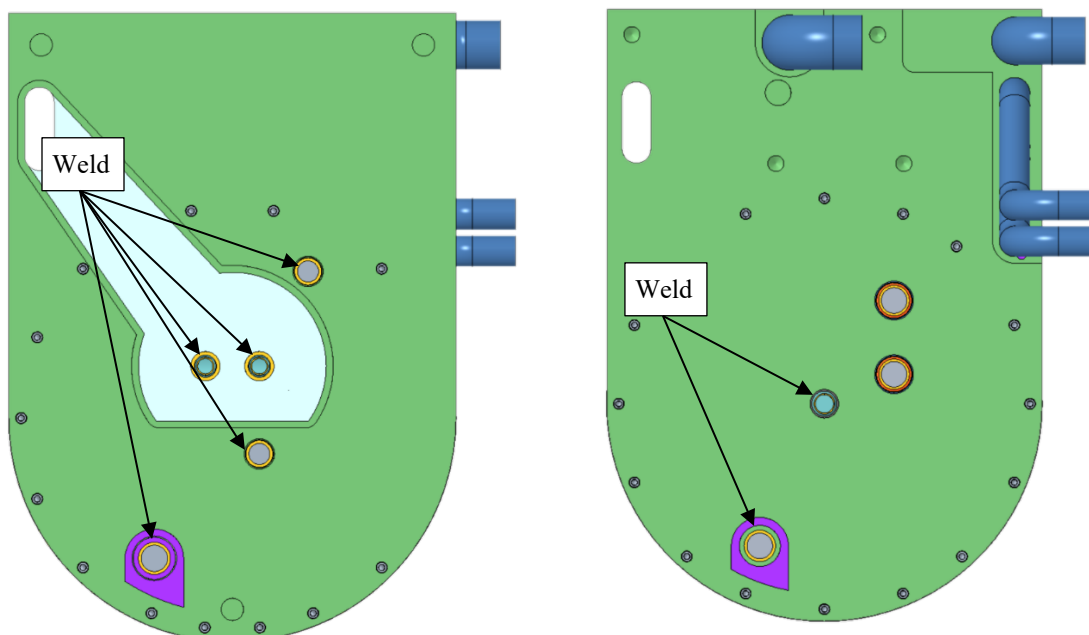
Lower (left) and upper (right) reflector vessel to backbone connection welds.
